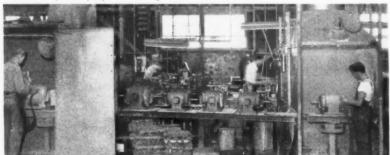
After painting and final inspection, packing and shipping Sterling power drive units.
